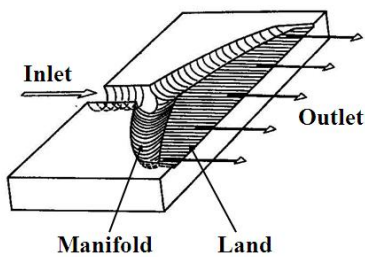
Schematic drawing of inside die geometry in the slot coater
